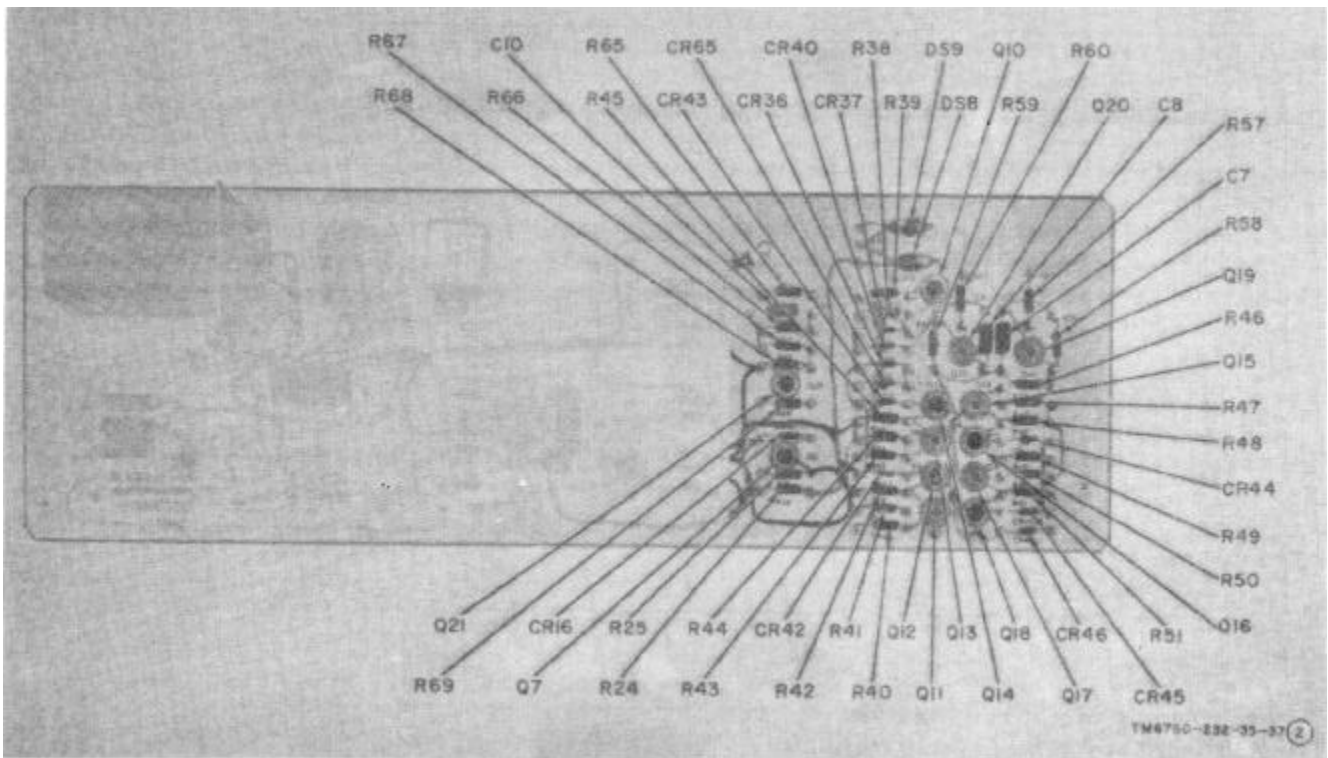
(2). Power chassis and component assembly A1A1A13, location of parts. (part 2 of 2).
